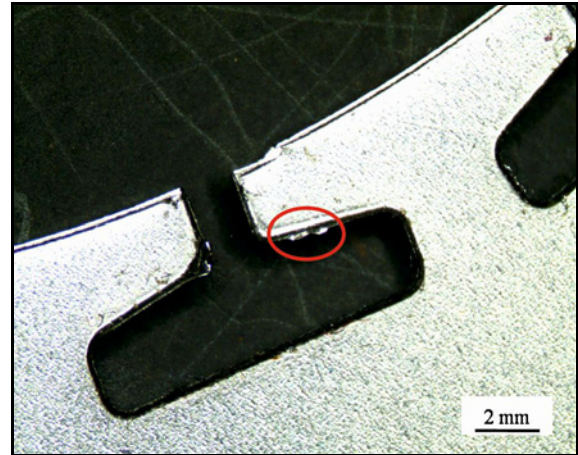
Macro view of the part printed with end-of-life punches (burr formation is circled in red).
